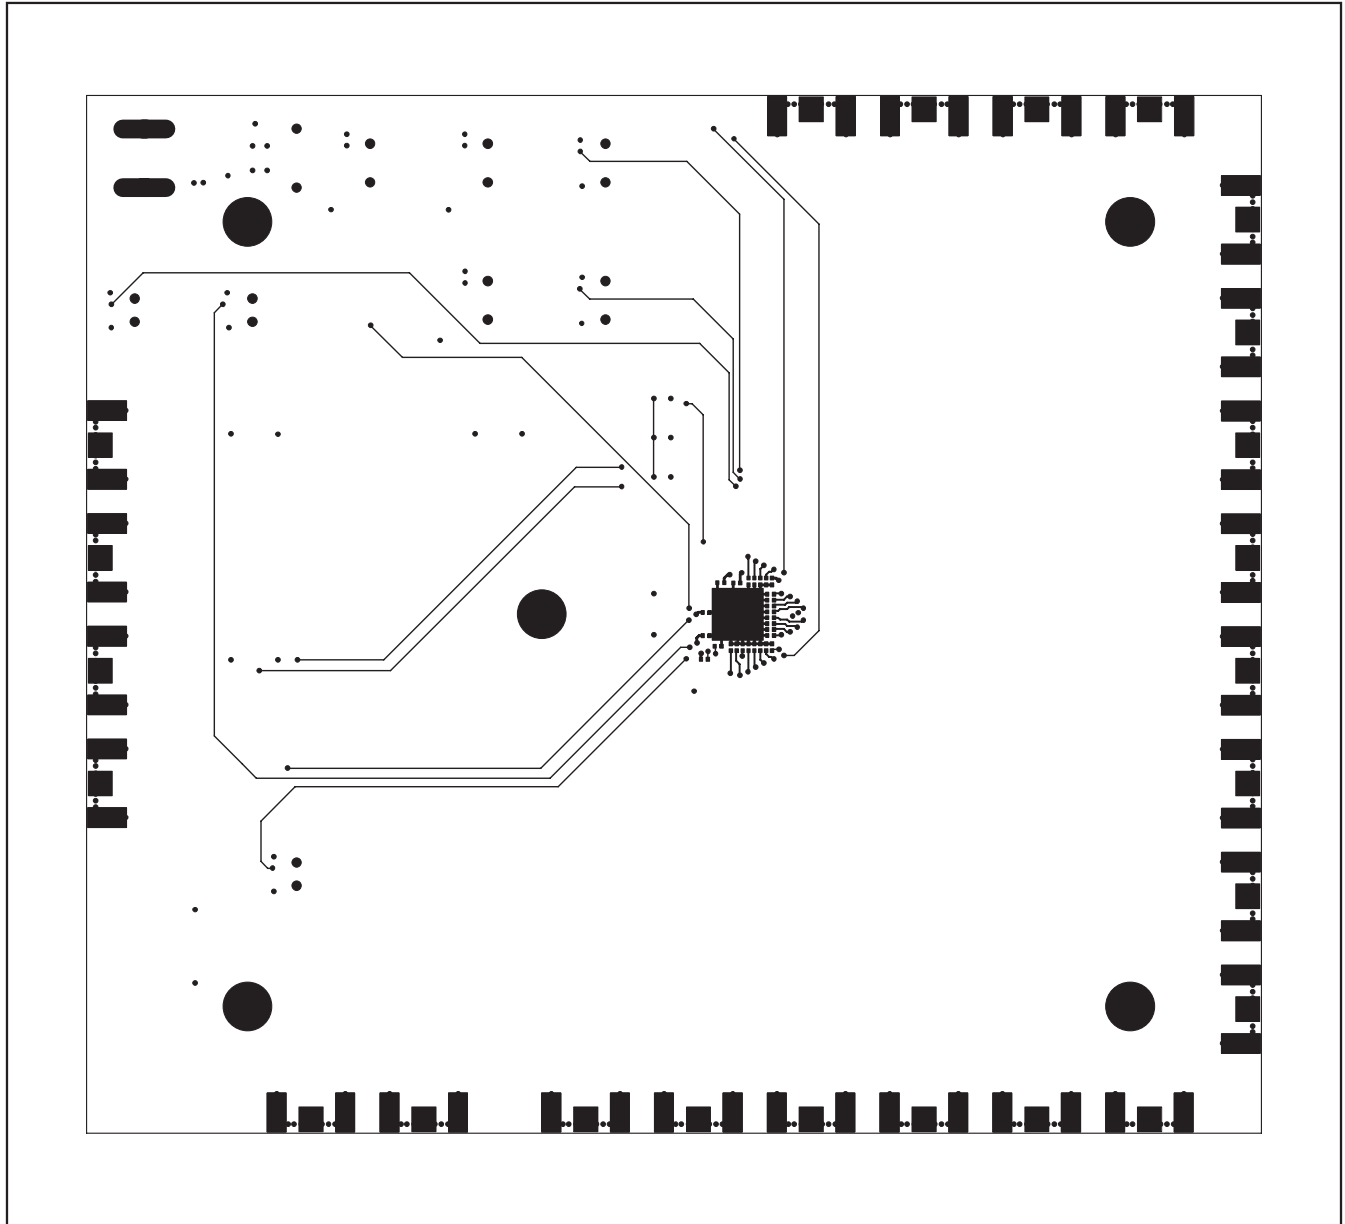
MAX3673 EV Kit PCB Layout—Solder Side
